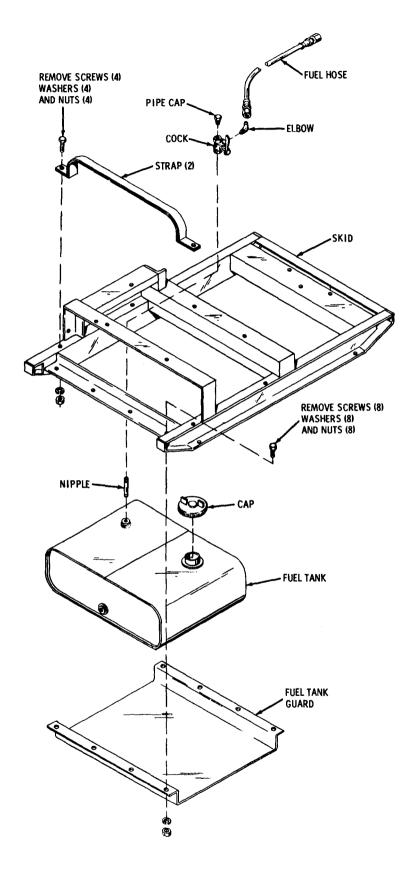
Fuel tank, lines, and fittings, disassembly and reassembly.
